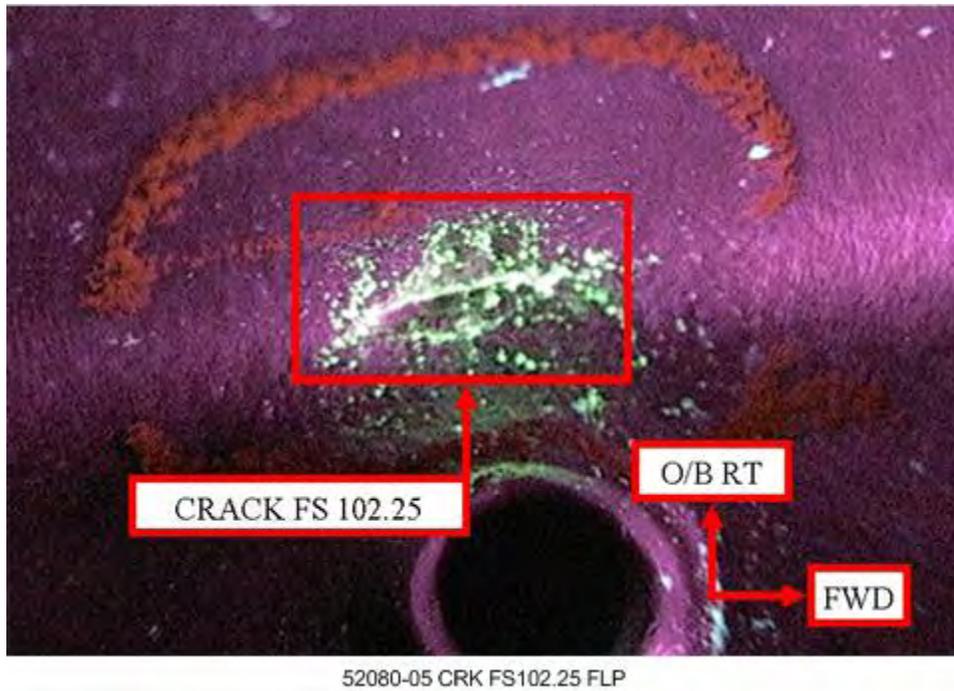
Fluorescent Liquid Penetrant Indication of the Crack on the Center Fuselage Right Stringer FS 102.25
